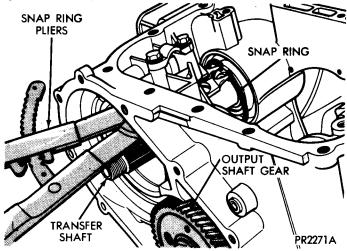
Remove or Install Transfer Shaft Bearing Retainer Snap Ring
